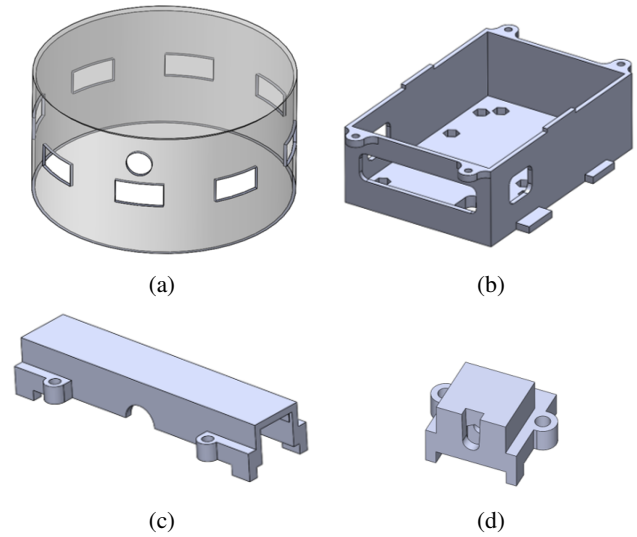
3D printing parts for SMARTmBOT; (a) Transparent case (1EA), (b)Power bank holder (1EA), (c) Motor mount bracket (1EA), and (d) Shaft support bracket (2EA).
